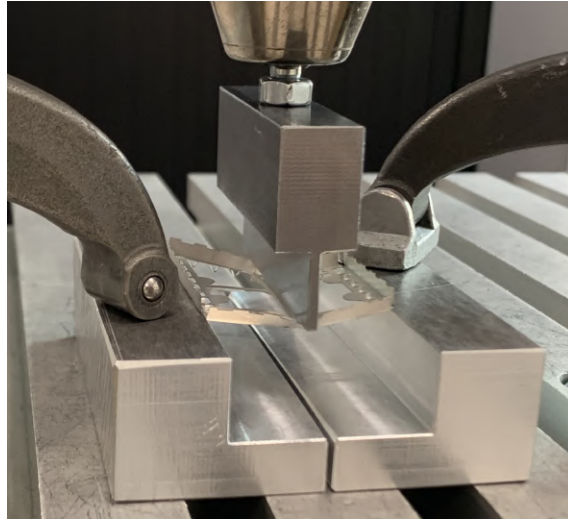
First attempt of custom fixture for the mechanical tests.
